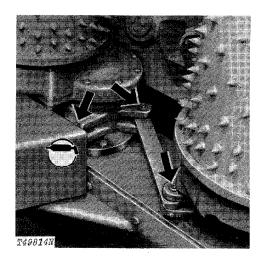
Feed Roll Cylinder Rod End Pivot and Feed Roll Crosslink (3 Points)
